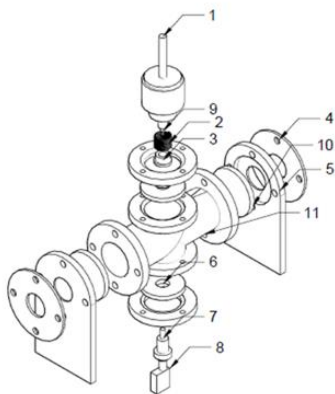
An exploded view of the thermal plasma reactor. (1) Plasma torch. (2) released spring, (3) cathode stopper, (4) back plate, (5) supporting leg, (6) marble plate, (7) anode, (8) cooling jacket, (9) cathode, (10) inspection window, (11) reactor chamber
